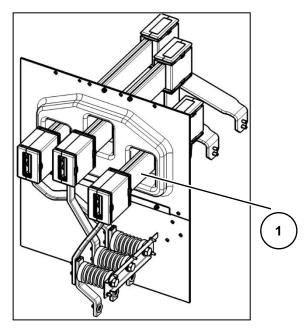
Contactor panels with panel width 435 mm: Detail view of busbar system with plastic tubes, for example
